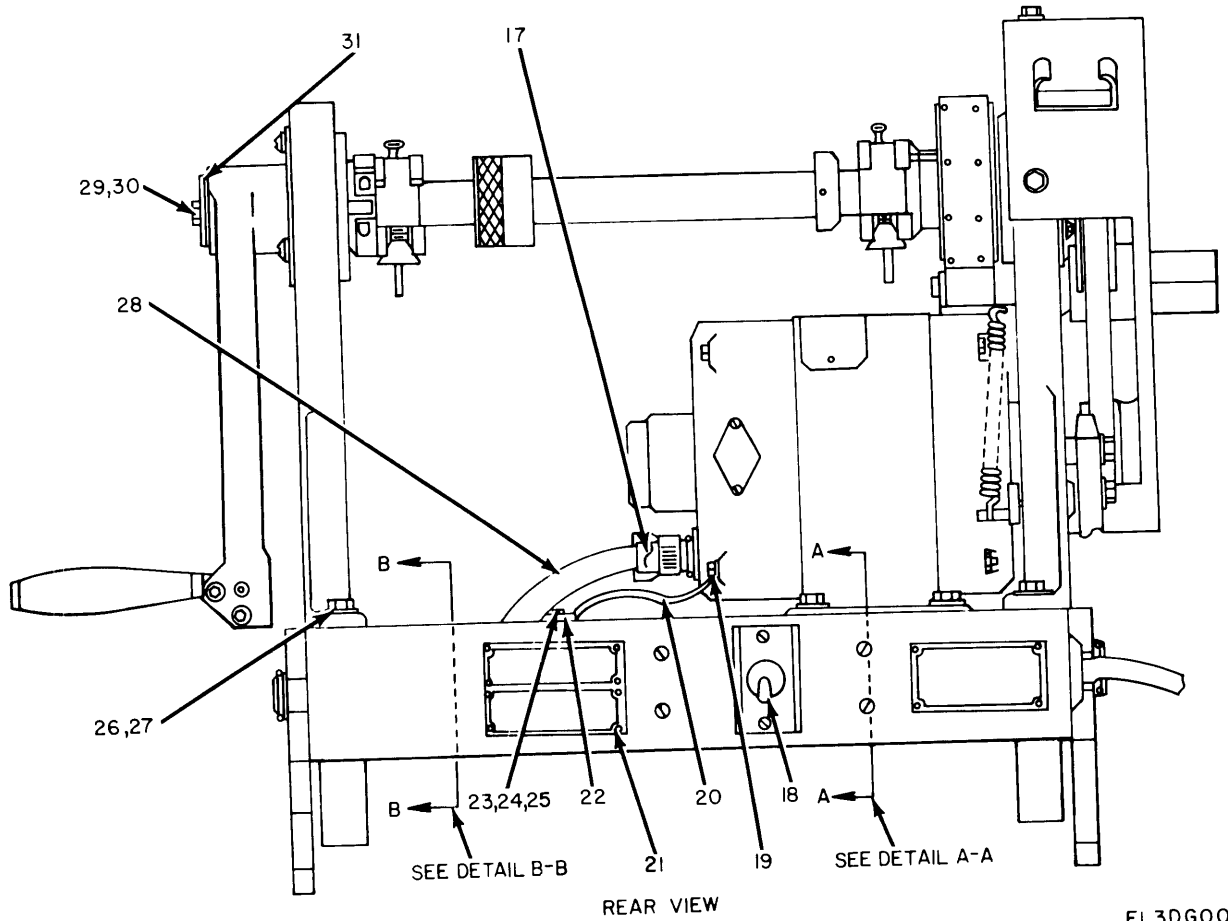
Reeling Machines, Cable, Motor Driven RL-172/G and RL-172A/G, (Sheet 2 of 3).
